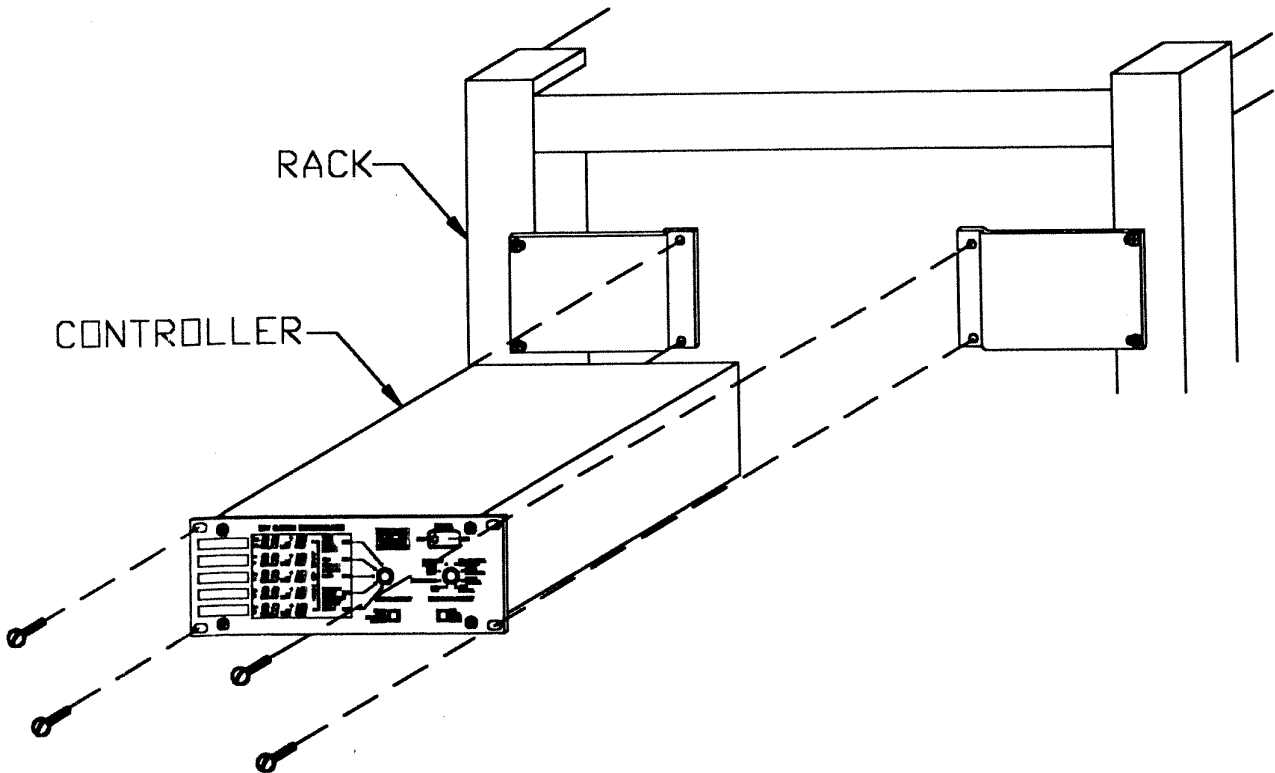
PANEL MOUNTING METHOD FOR FULL RACK
